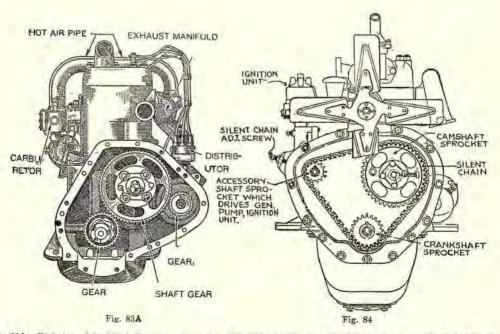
A. End view of the Mitchell engine. Note that the crank-shaft gear (lower one) drives the cam-shaft gear (large one). The cam-shaft gear then drives the generator gear (on the right).
